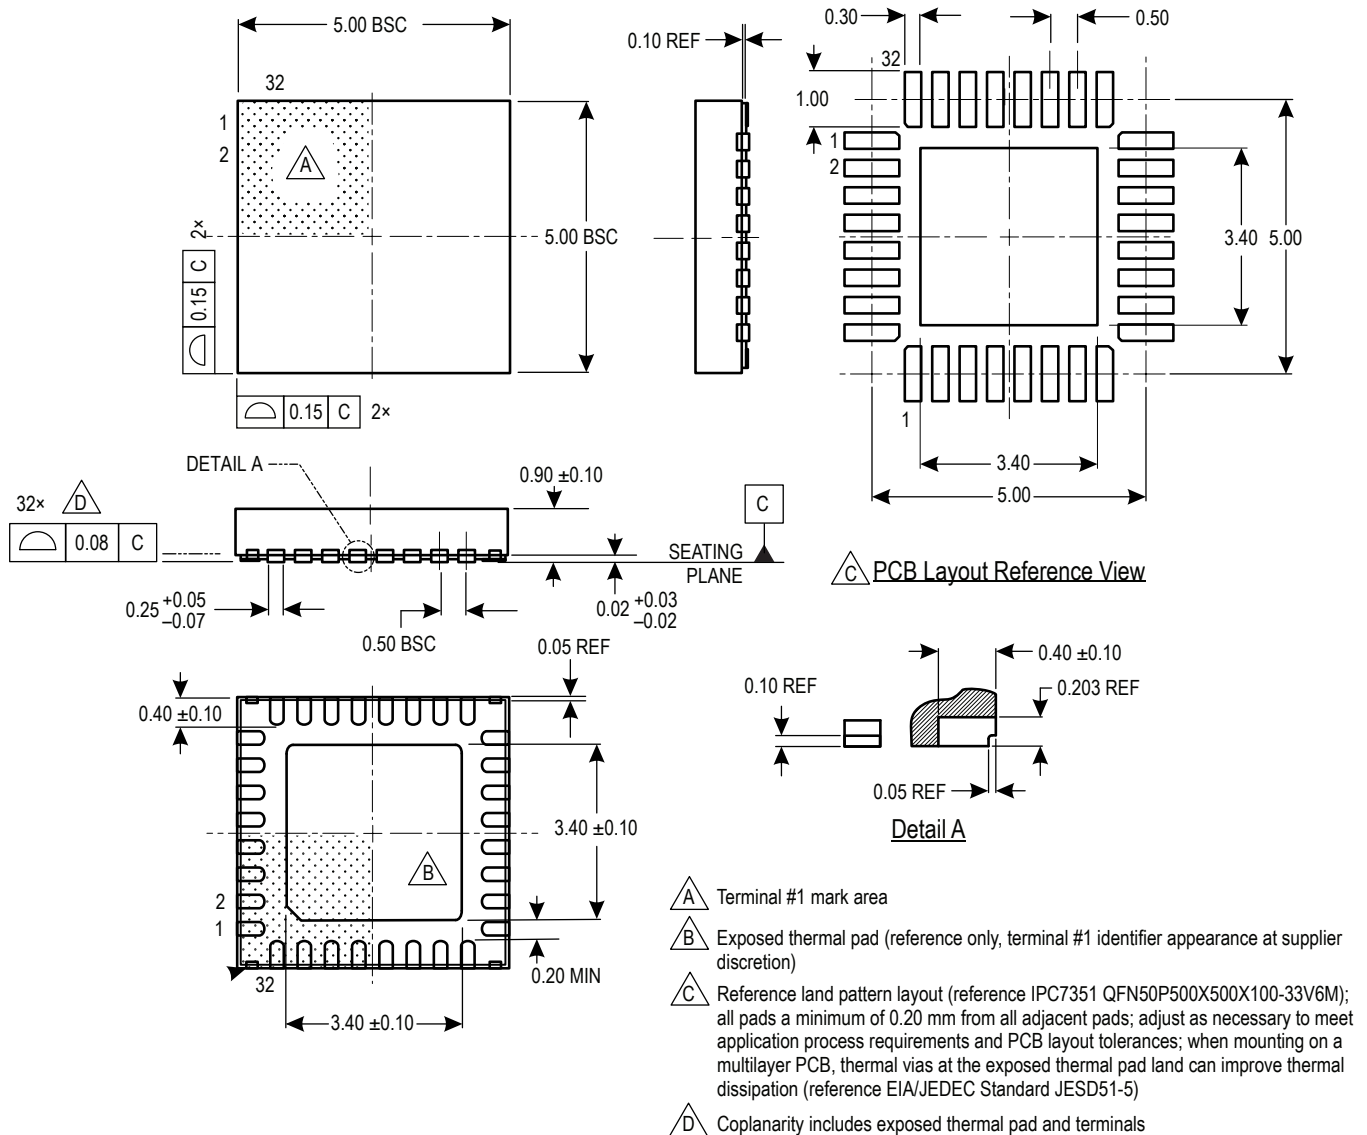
32-Pin 5 mm × 5 mm QFN with exposed thermal pad and wettable flank (suffix ET)
